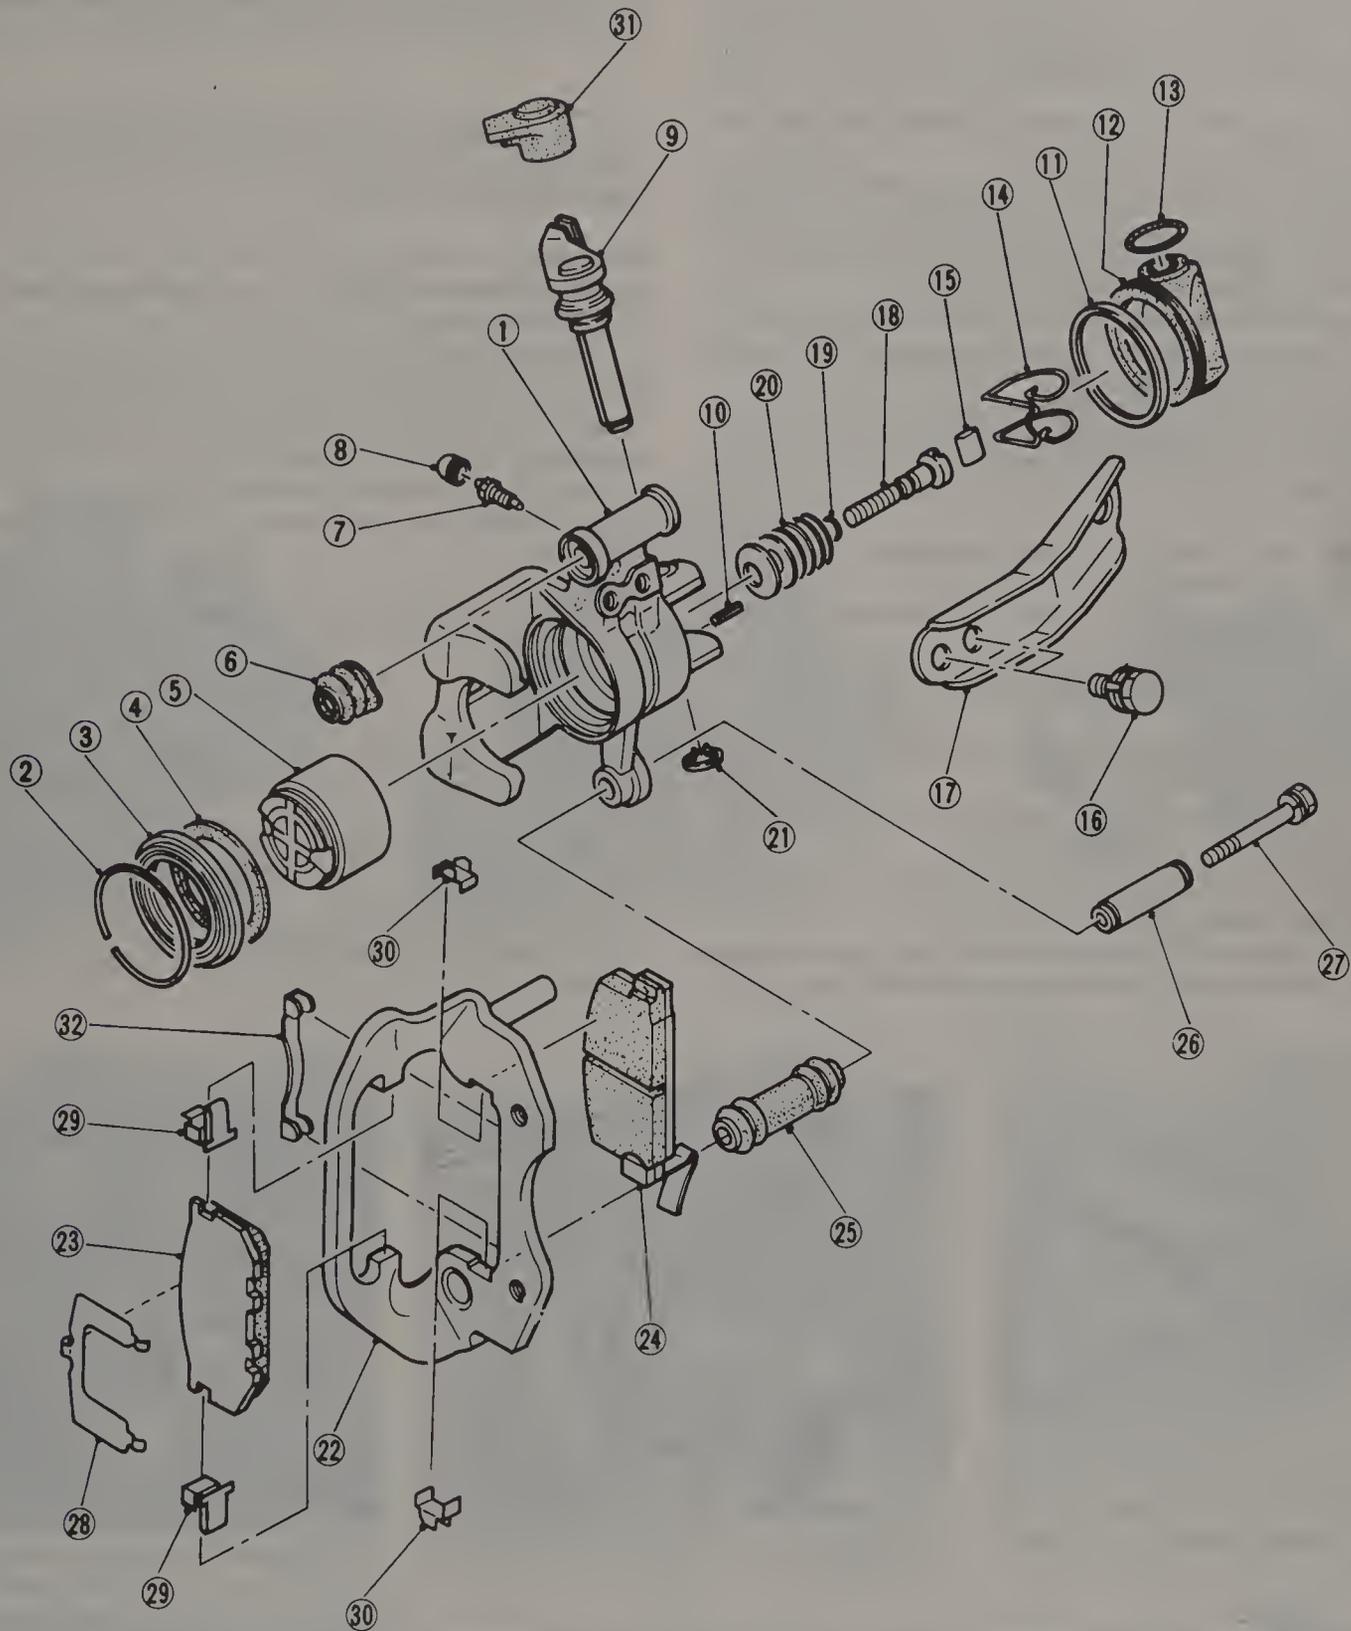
Front disc brake components – exploded view (Sec 5)
